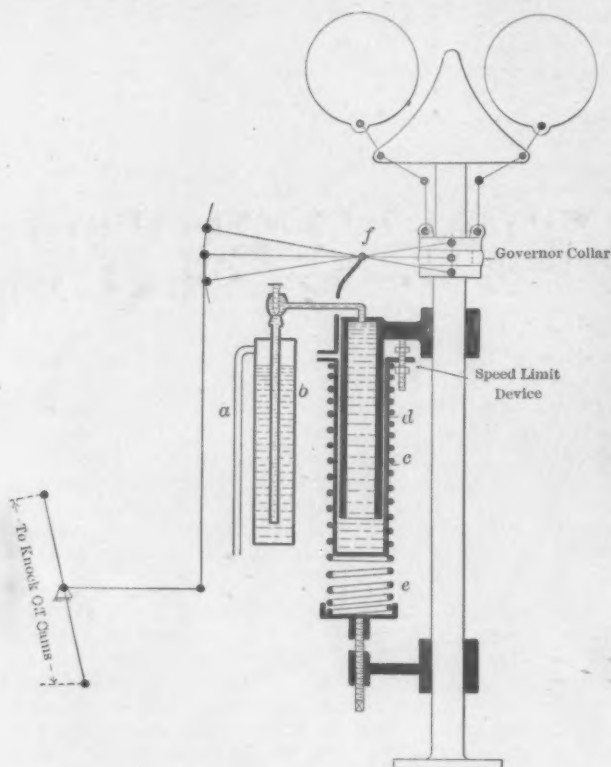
Details of a New Type of Pressure Regulator Used on Air Compressors Built by the Allis-Chalmers Company, Milwaukee, Wis.
